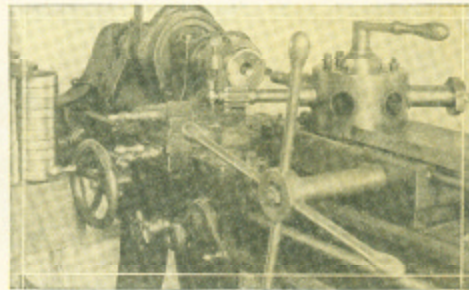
Lathe Equipped with Turnstile Bed Turret for Manufacturing.
